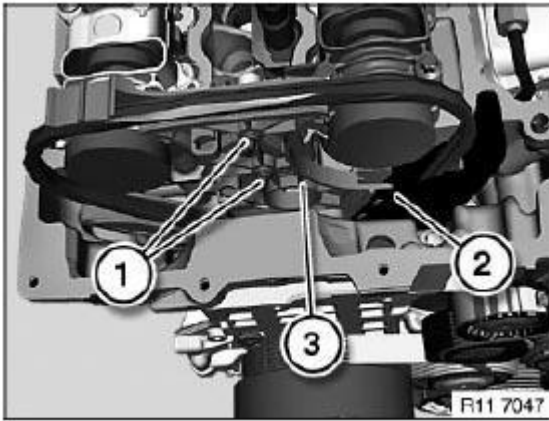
Identifying Screws, Timing Chain Module And Junction
